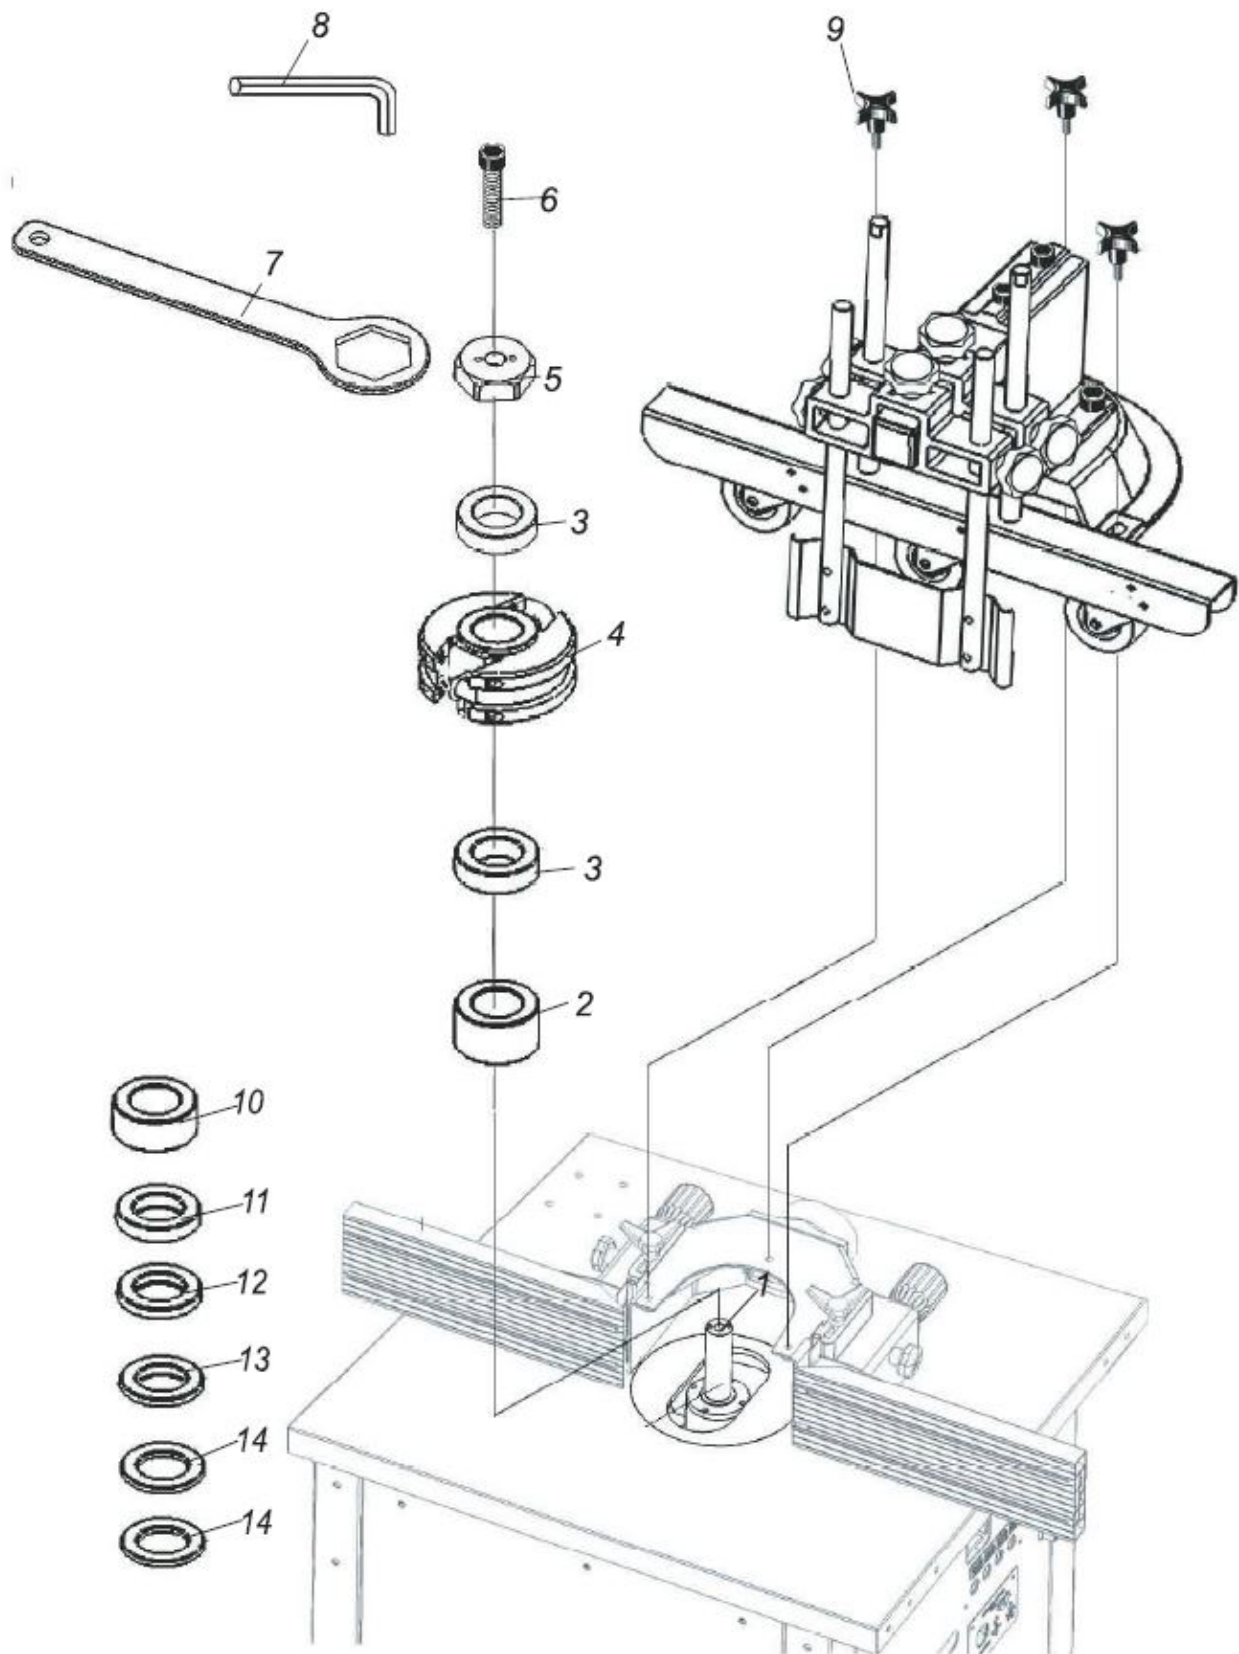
Spare parts drawing 1 - Table router TF 190 SE
